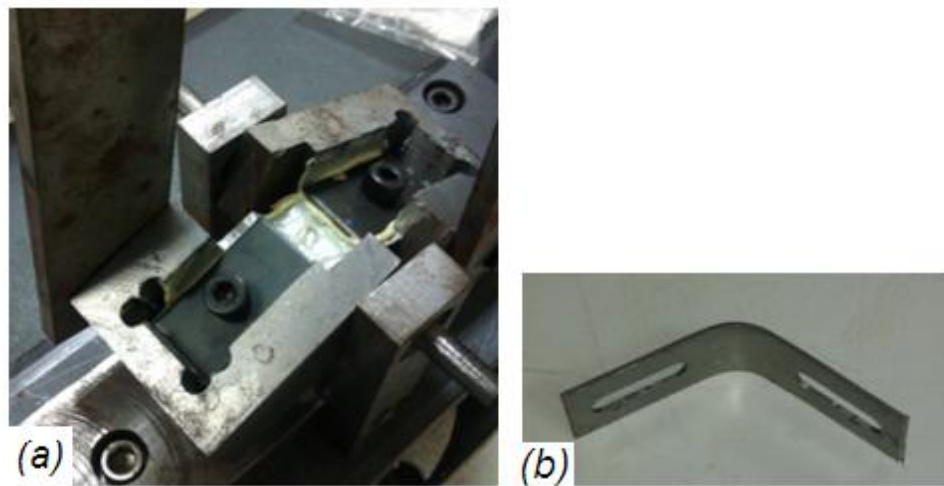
Sheet metal in bent position (a) and the produced part after the process(b)
